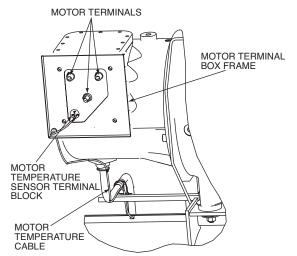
Motor Terminals (Units with Q,R Compressors Shown)
